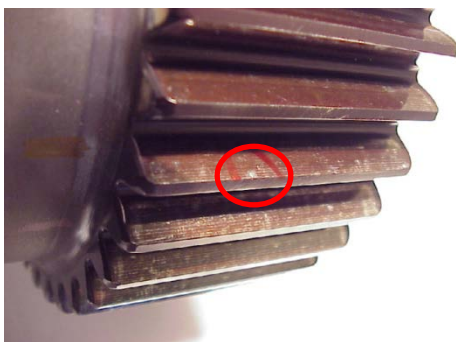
Boeing CH-46 Sun Gear with identified FOD damage (Ref. 9)
